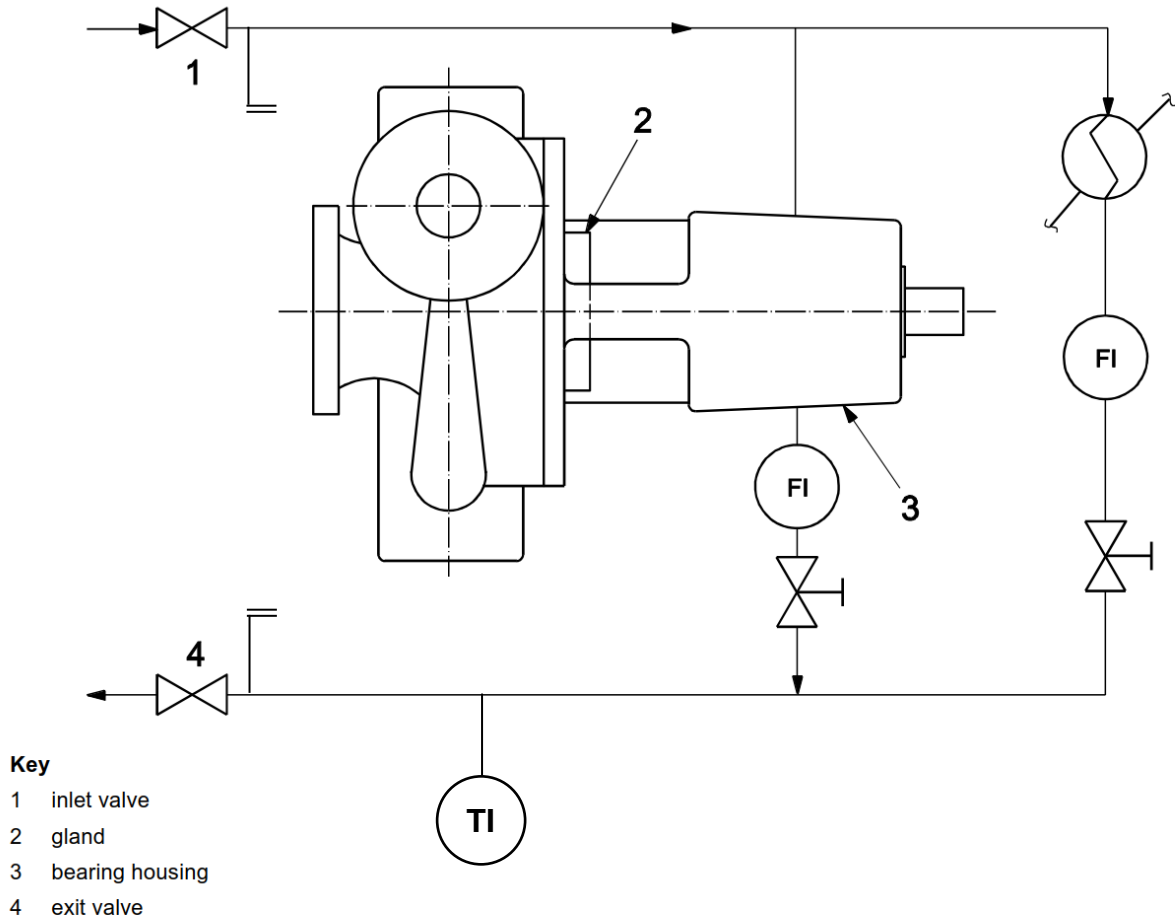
Piping for overhung pumps — Plan K, cooling to bearing housing with parallel flow to seal heat exchanger
